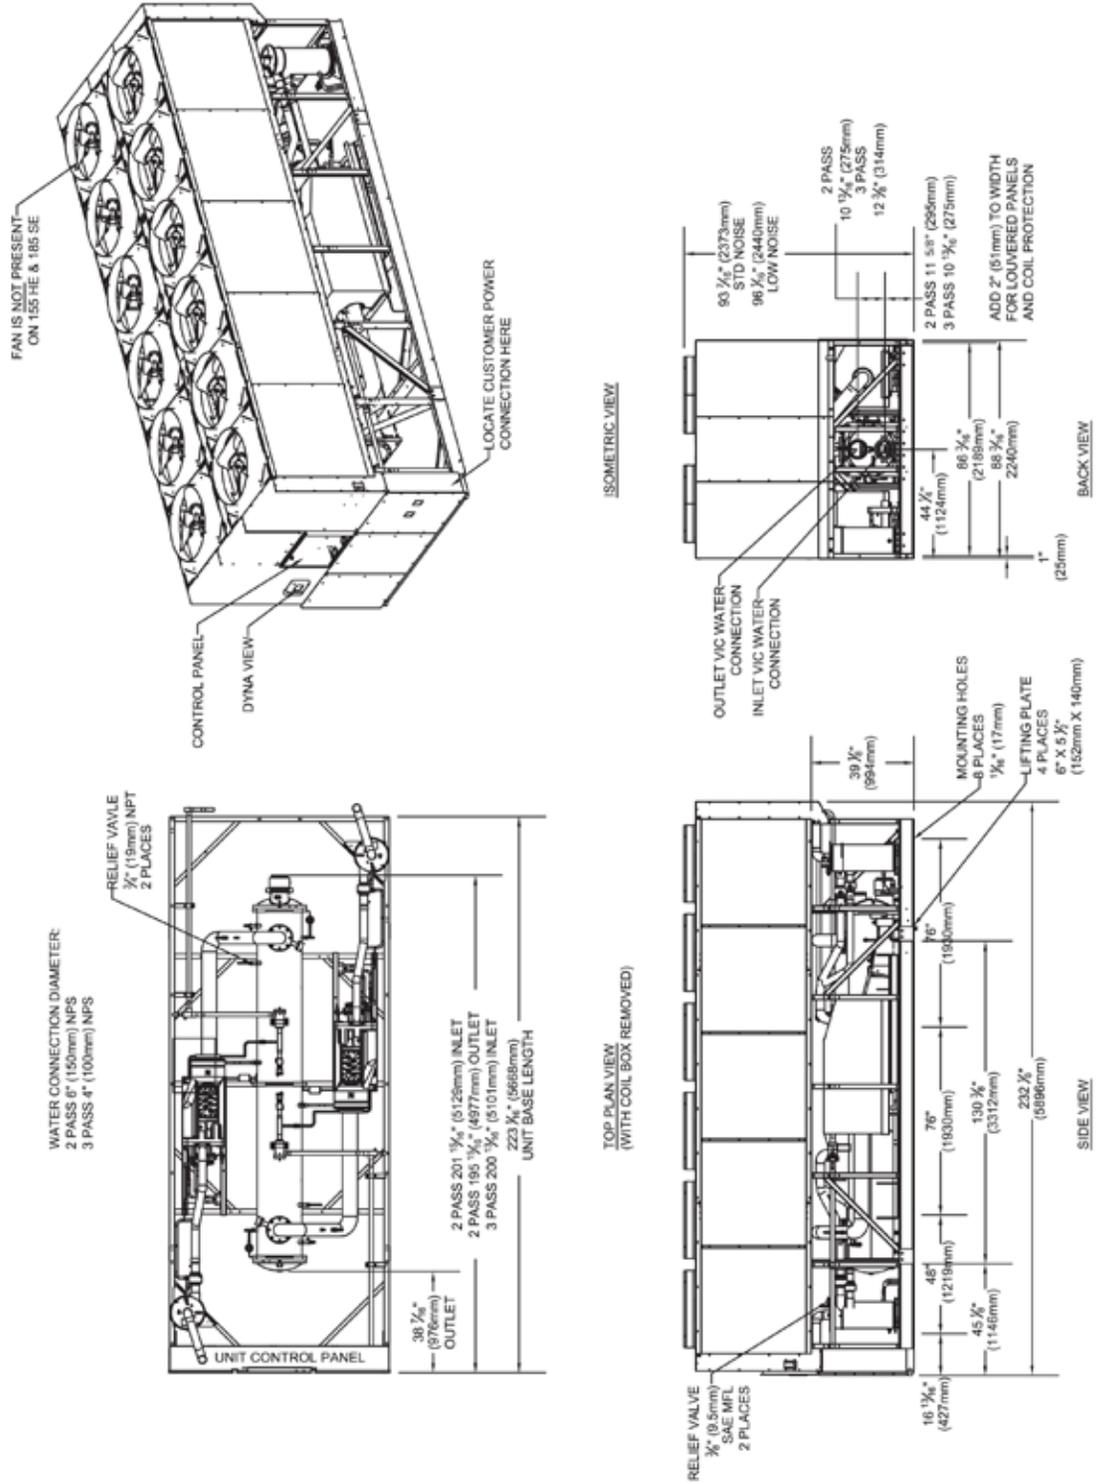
Unit Dimensions 140 HE 170 SE - 50/60 HZ
